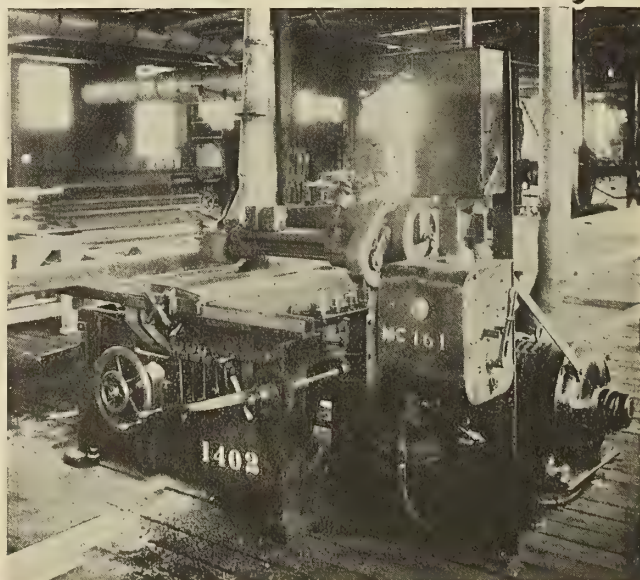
15-Horsepower Alternating Current Squirrel Cage Motor Driving Planer in a Shipyard
